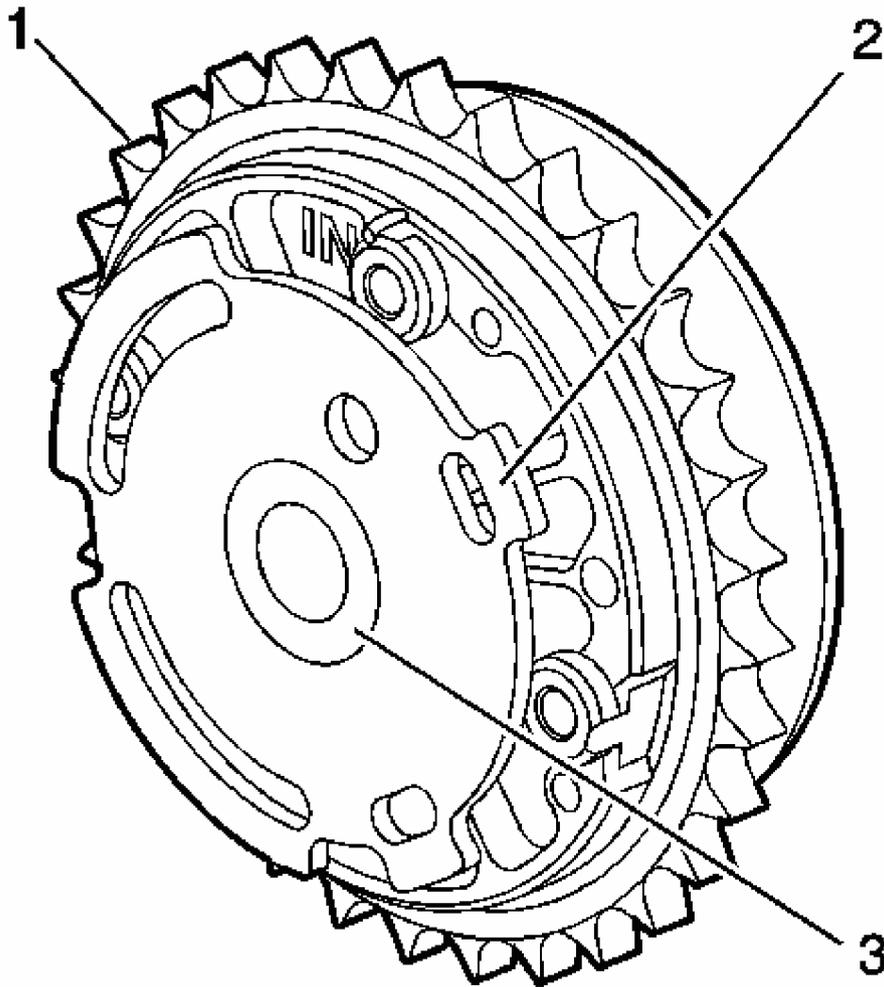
Inspecting Front Intake Camshaft Position Actuators
